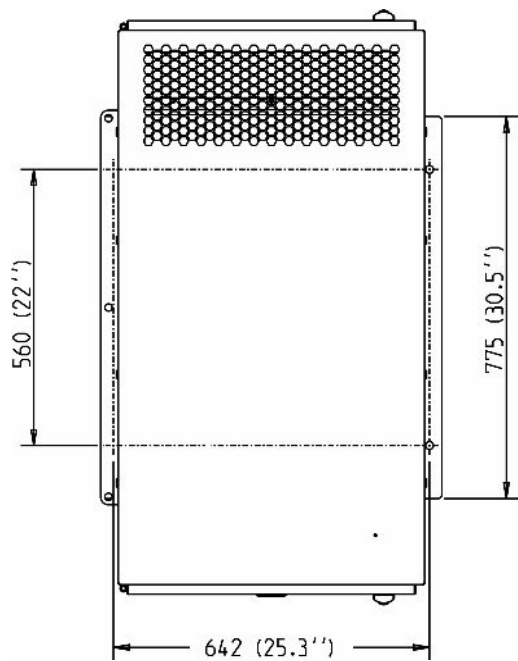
Seismic PARC4.X Mini Cabinet Mounting Hole Locations
